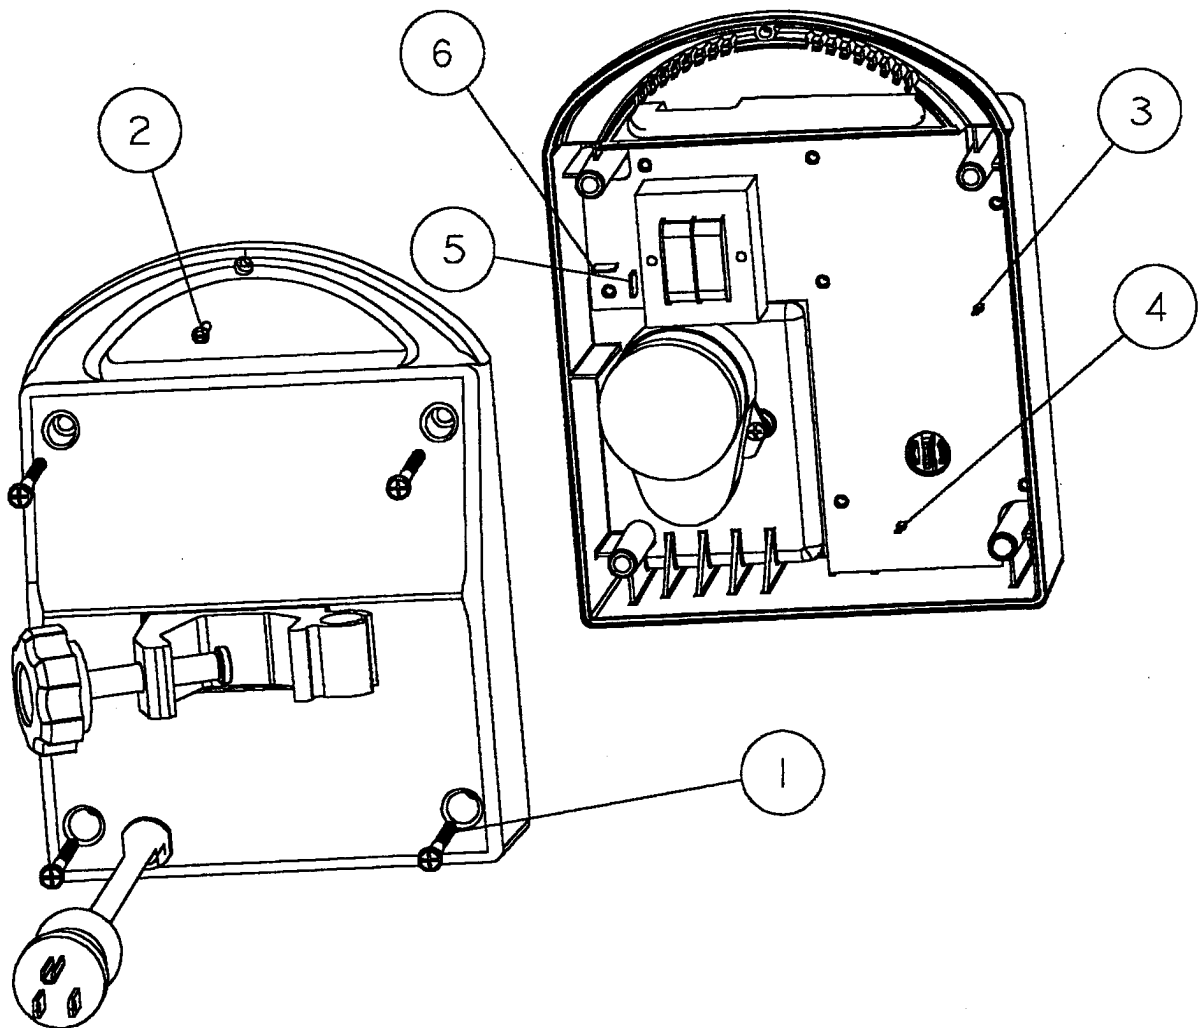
Separating Front and Rear Assemblies (115 VAC)
